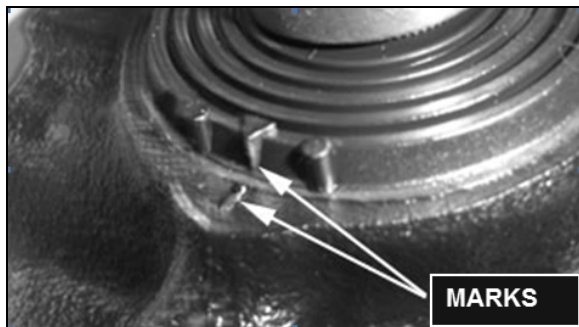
STEERING GEARBOX INPUT SHAFT MARKS
